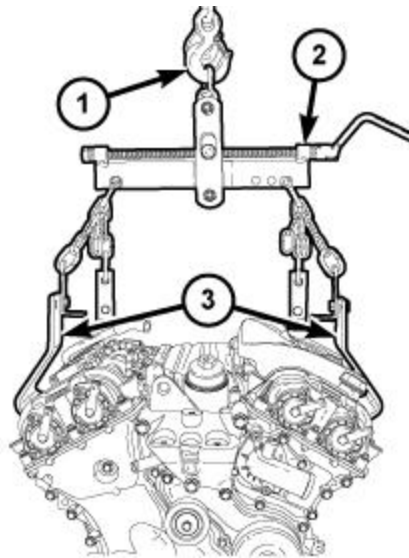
Passenger Side Engine Lifting Bracket & Bolts
